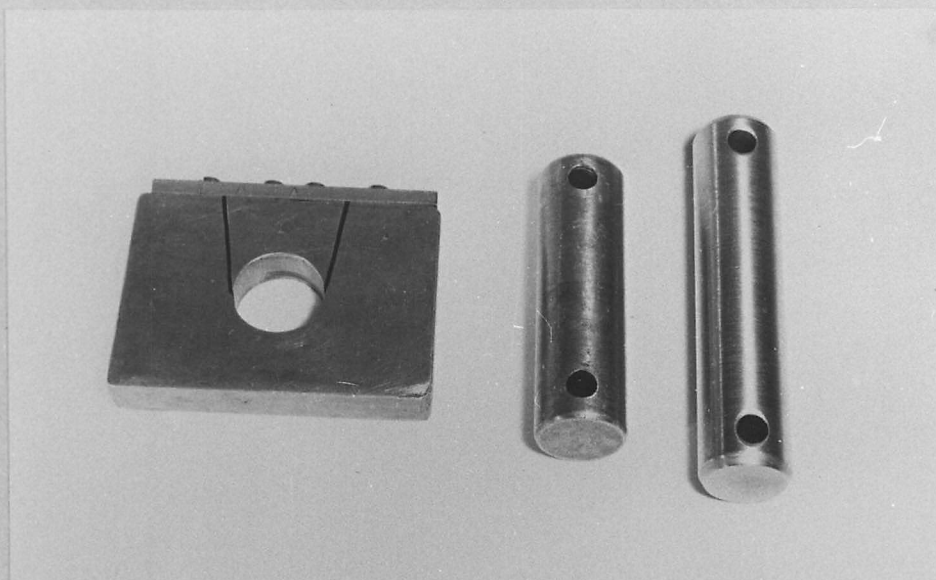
10) Appearance of clamp used in securing inner grip
